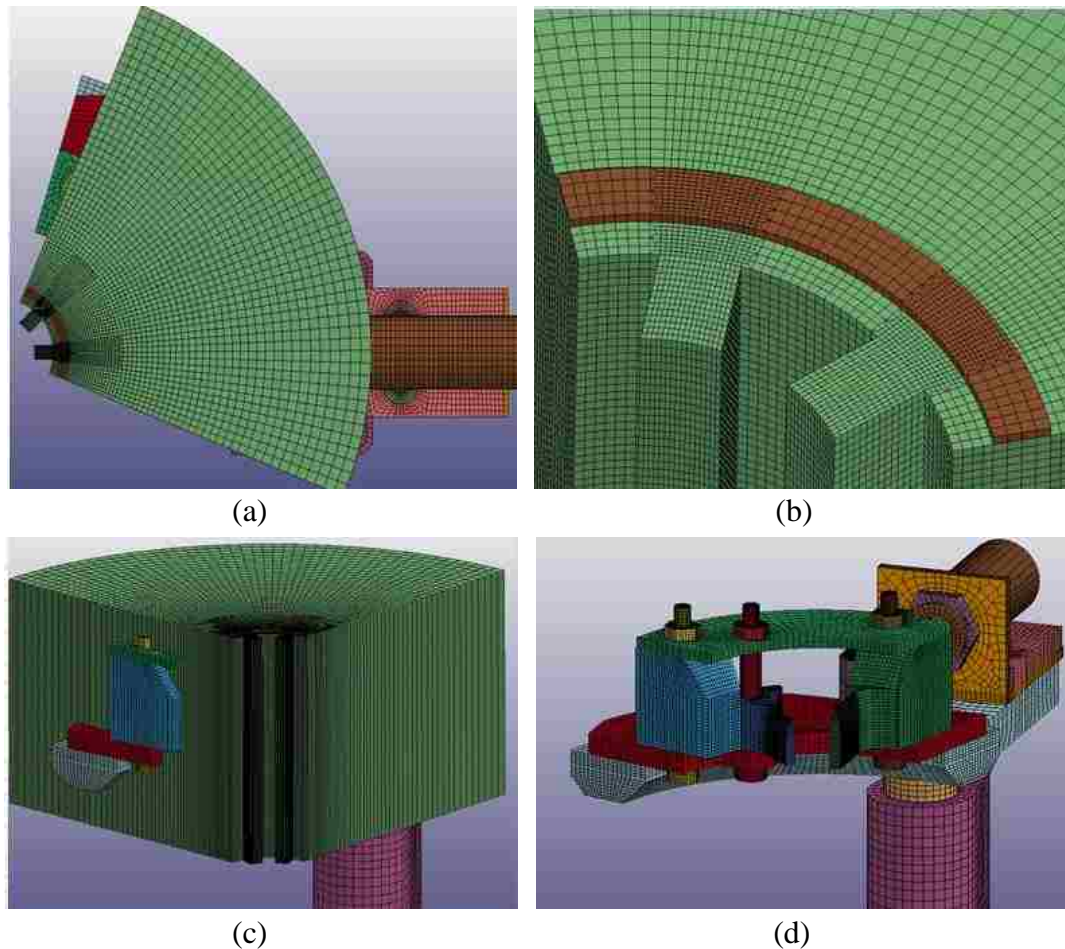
Model of first adaptive cutter in 8-blade cutting. (a) Top view. (b) Close-up view of extrusion and airmesh interface. (c) Isometric view of complete model with airmesh. (d) Airmesh removed.
